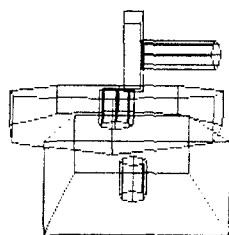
Peg on Wheel, Wheel on Inverted Block
